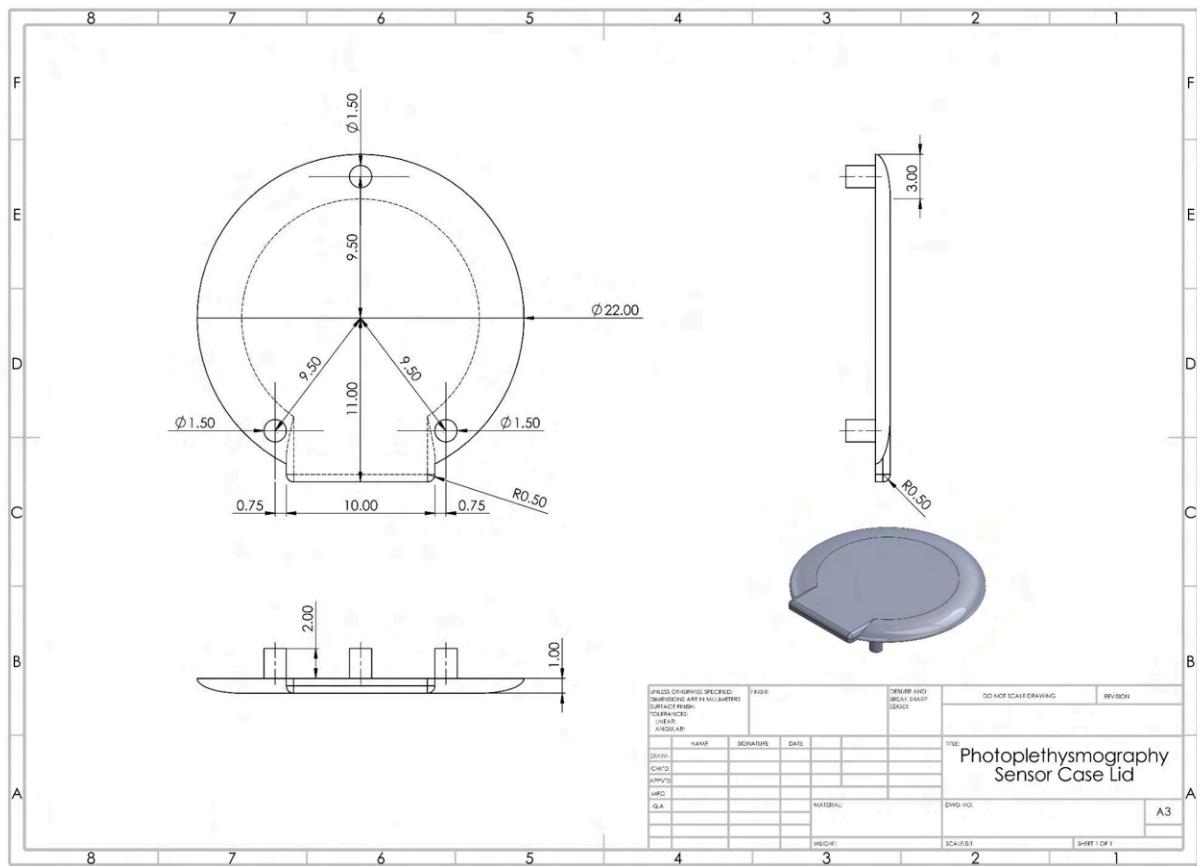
PPG lid. The dimensions in this figure are in mm. A symmetric fillet is used on the edge of the lid; the two radii are 1 mm and 3 mm (as labeled in the bottom and side views).
